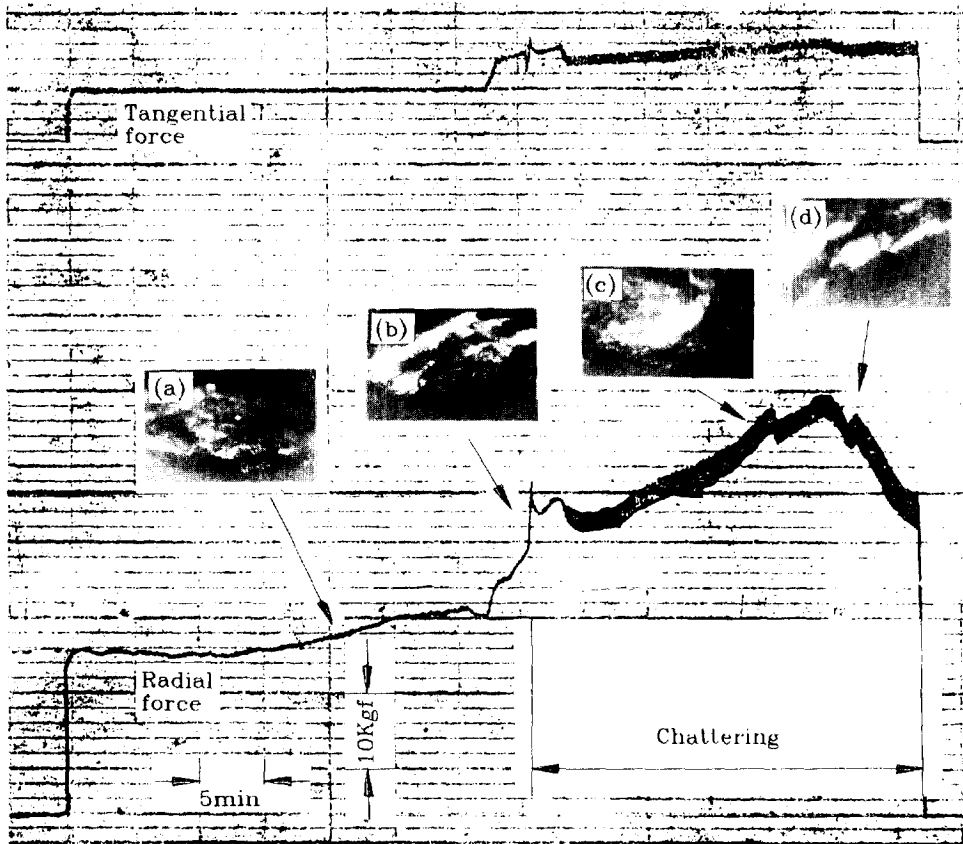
Patterns of cutting tool fracture in accordance with variation of cutting force.
